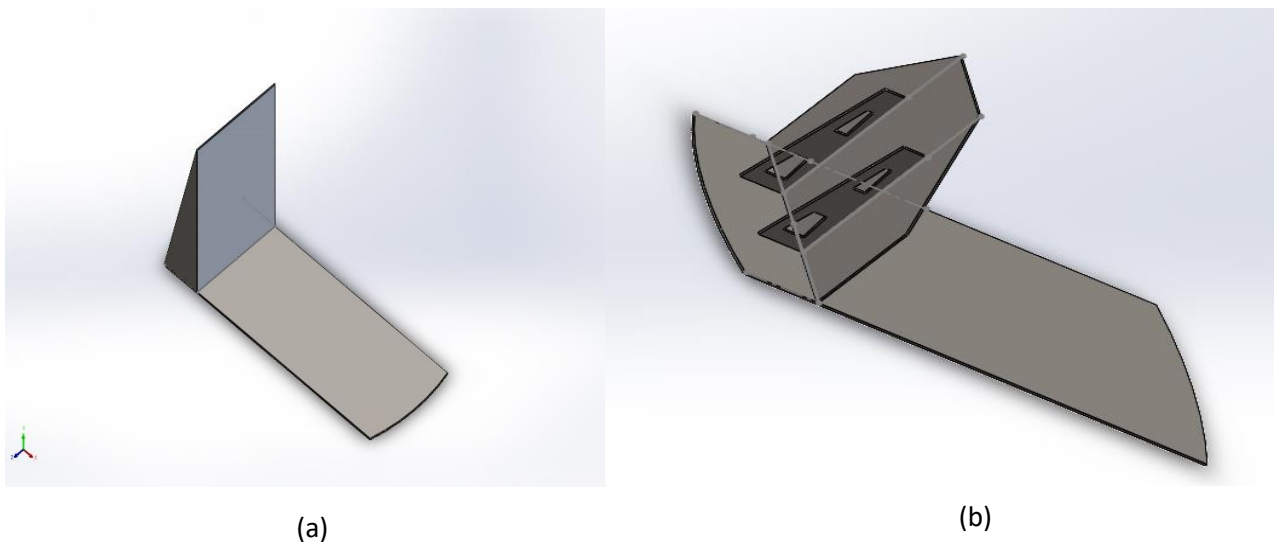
Design of barrier wall a) with reinforced triangular supports (b) Pentagonal wall with supports
